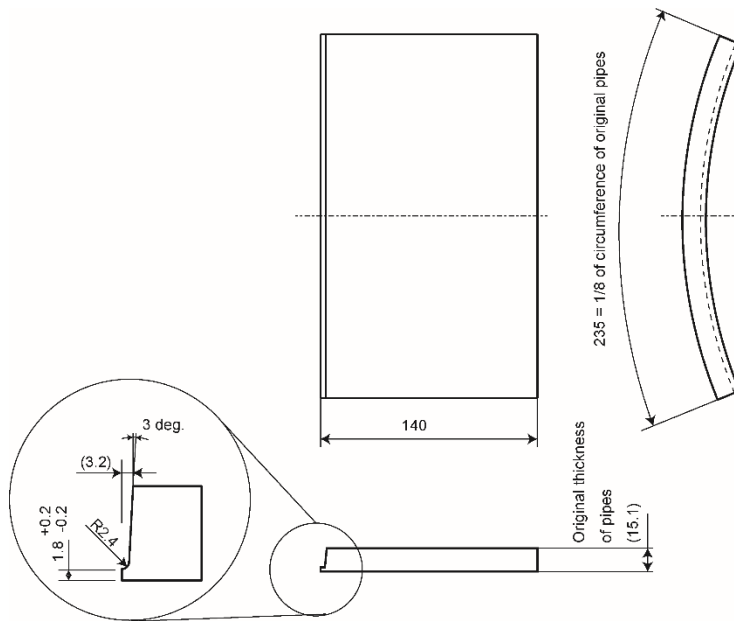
Drawing of weld bevel used in the present study
